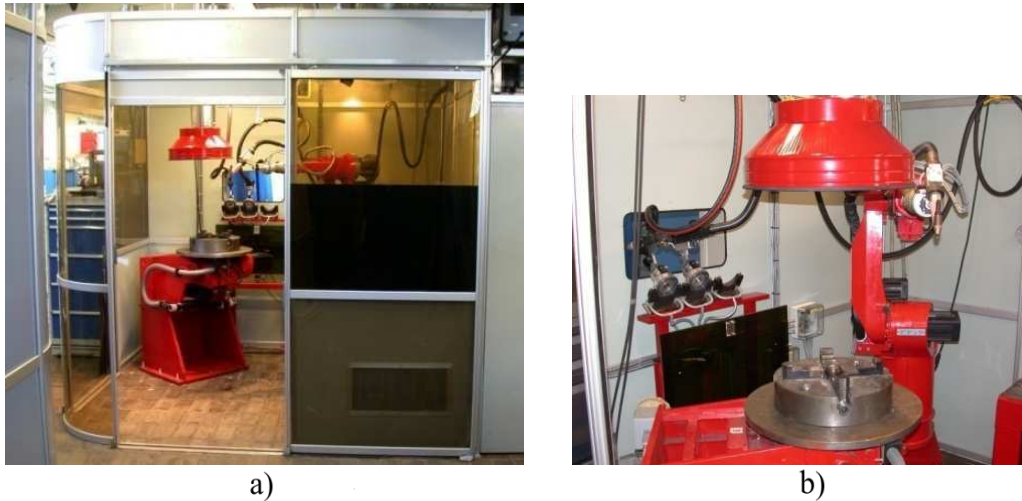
The robotized PTA welding unit: a) an overview and b) the robot, the rotating table, and an automatic torch change system for the GTA, the MIG/MAG, and the PTA welding torches
